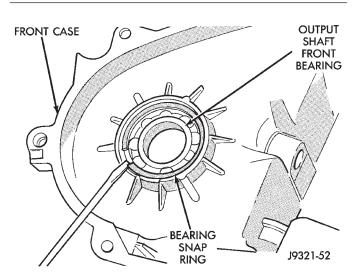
Output Shaft Front Bearing Snap-Ring Removal
